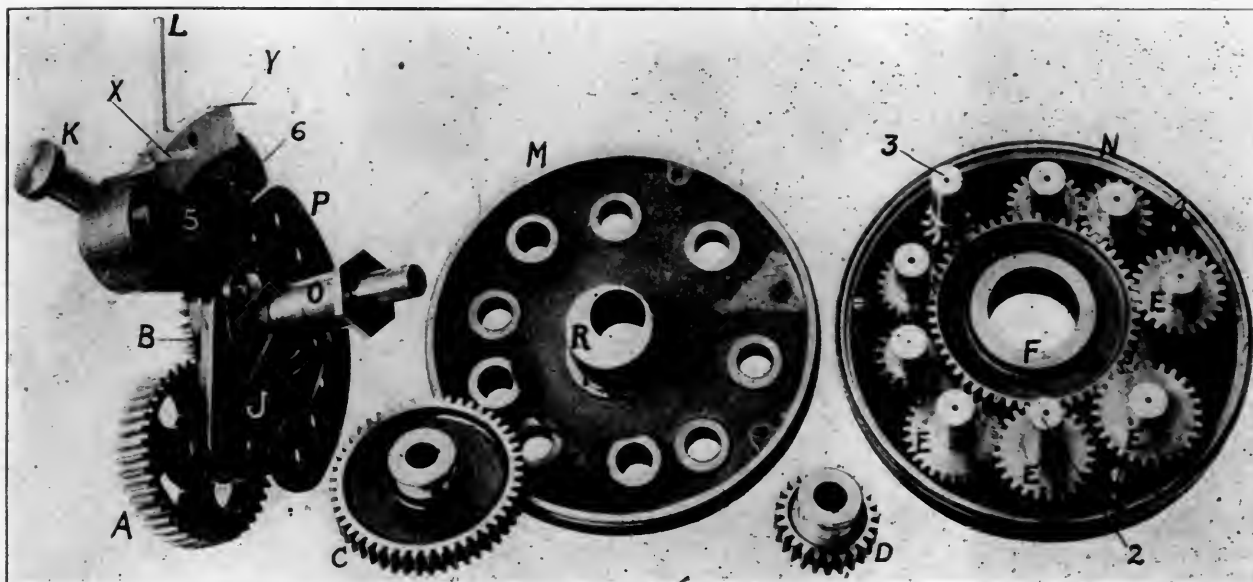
INTERNAL VIEW OF FEEDING ATTACHMENT, SHOWING ARRANGEMENT OF THE COMMON INTERMEDIATE GEAR AND MULTI-SPEED PINIONS.
